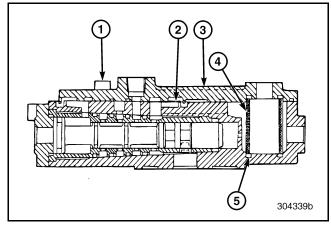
Cutaway View of Range Shift Interlock Valve Assembly
